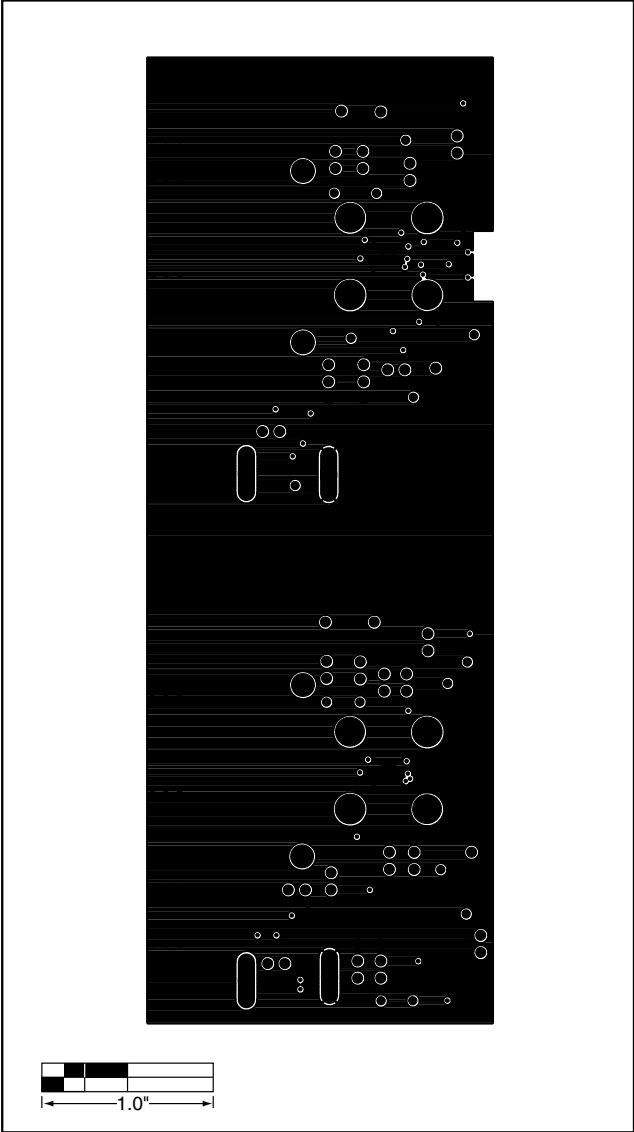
MAX3273 EV Kit PC Board Layout—Ground Plane
